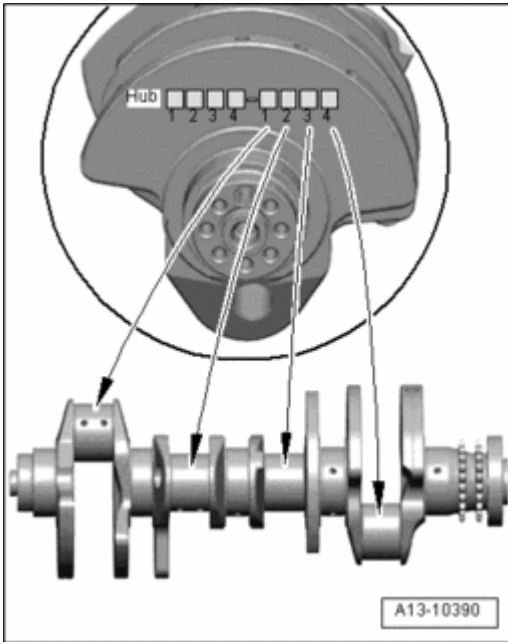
Allocation Of Connecting Rod To Crankshaft Is Identified By Letter On Front Crankshaft Counterweight
